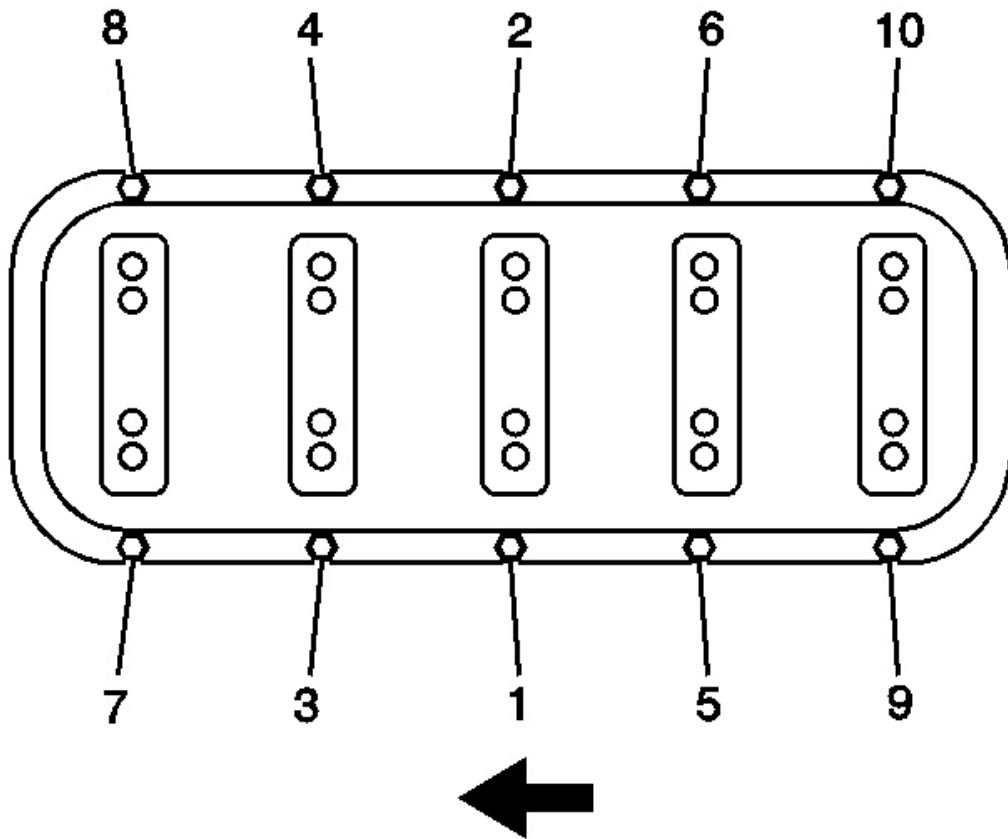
View Of Lower Crankcase Perimeter Bolt Tightening Sequence
